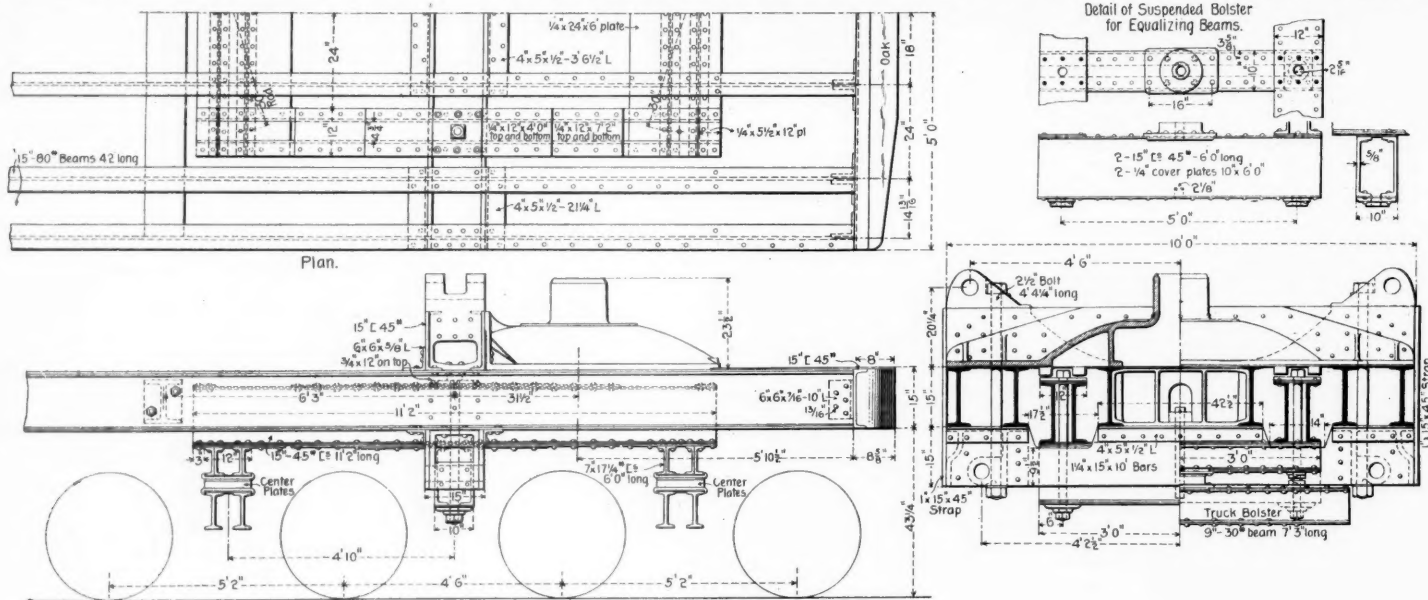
Front End Details 35-Ton Wrecking Crane.
